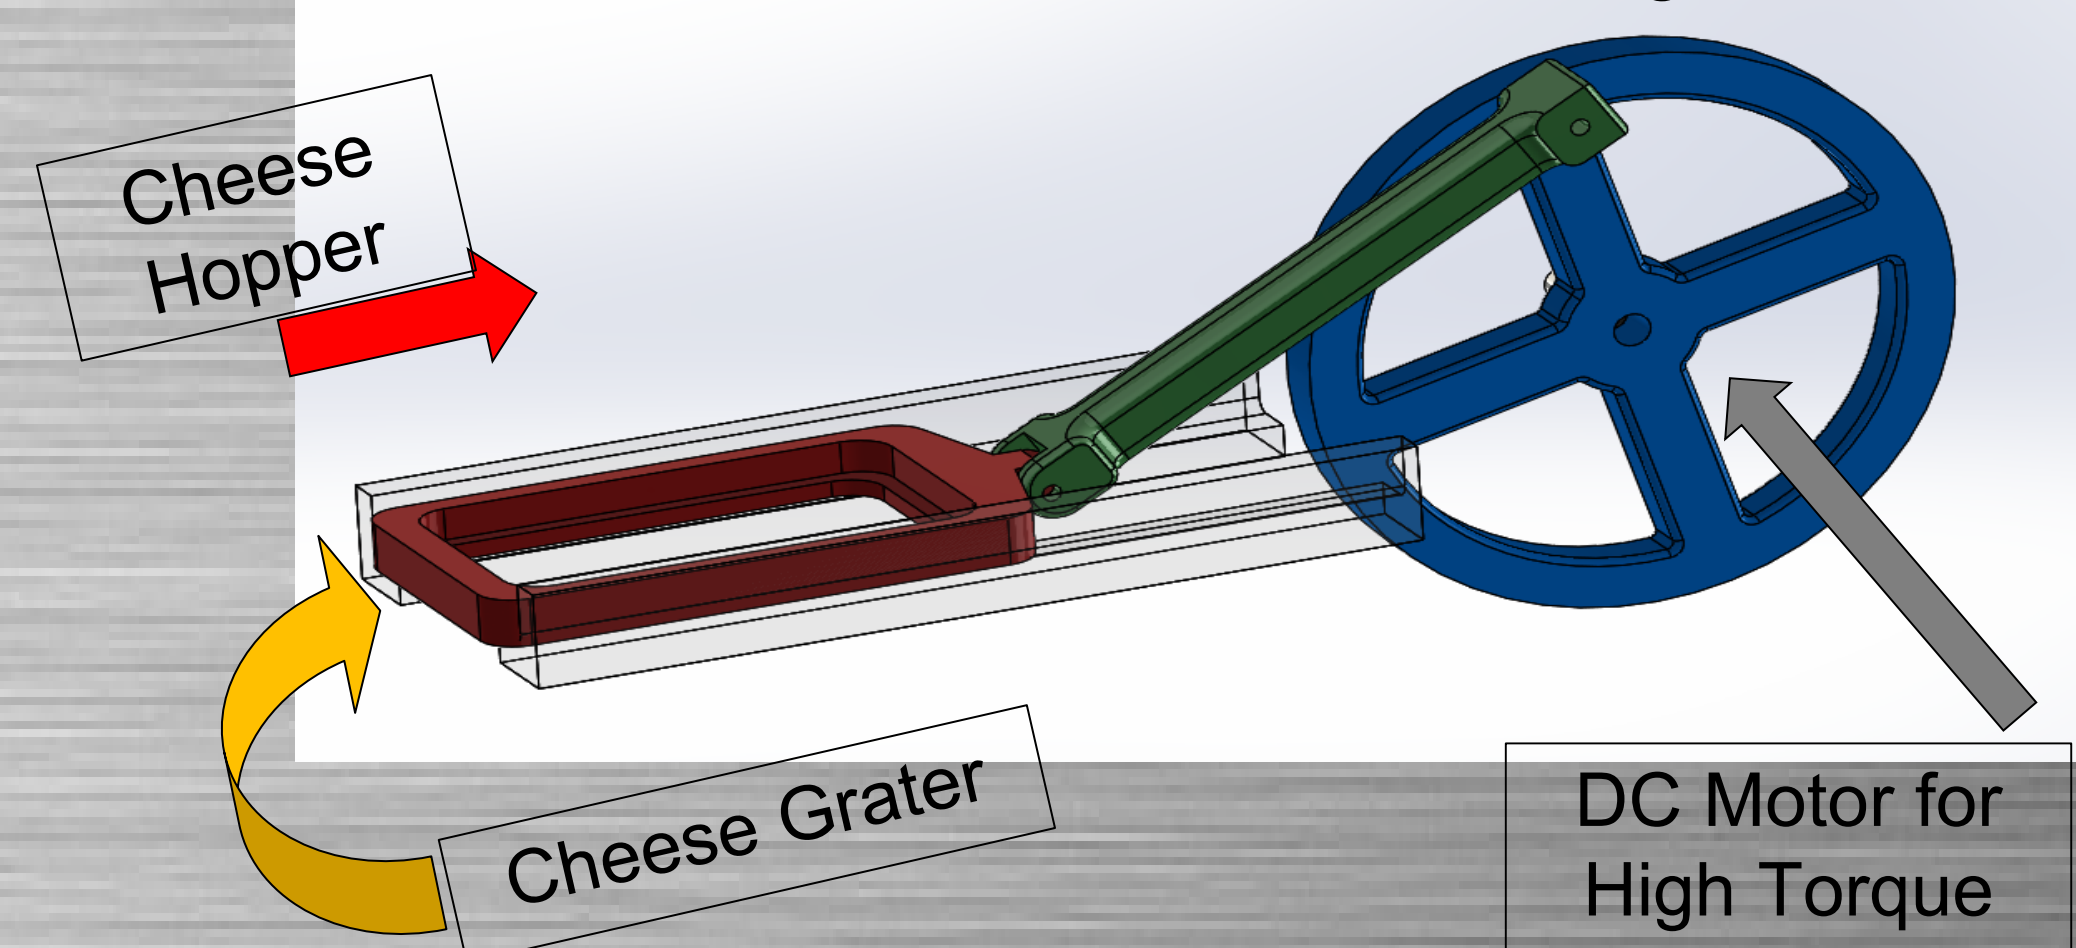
Slider Crank Mechanism (Cheese Shredder)
